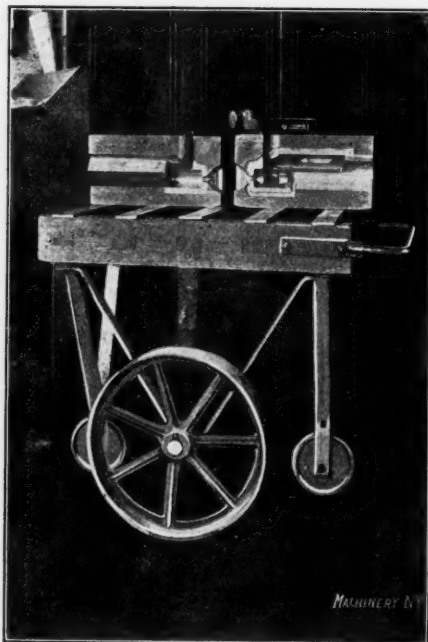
Dies in which a Boring Tool Shank is forged, and a Convenient Form of Shop Truck
